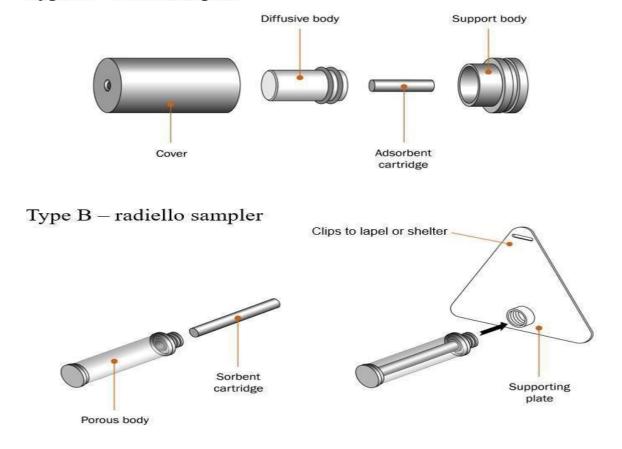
EXPLODED DIAGRAMS OF TYPE A (POD) AND TYPE B (RADIELLO) SAMPLERS SHOWING ALL COMPONENTS AND HOW THEY GO TOGETHER
